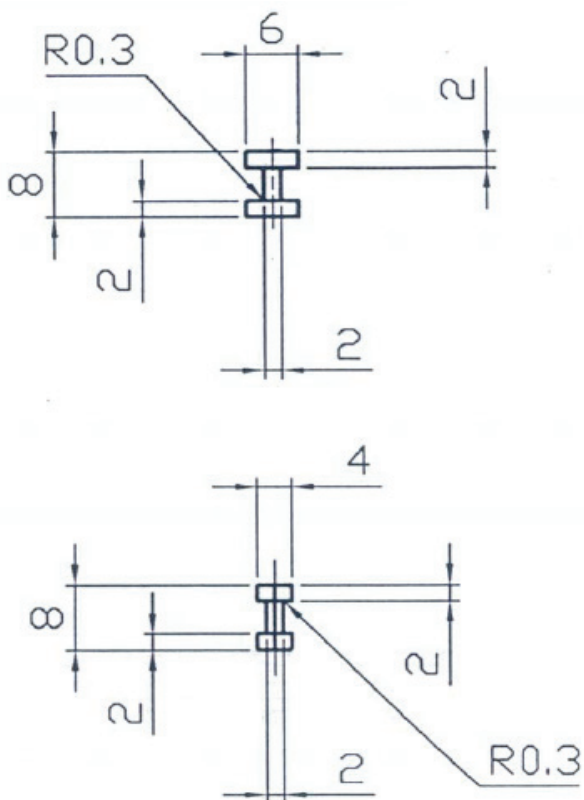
Double-T shaped specimen for the tensile testing of diffusion welds.
